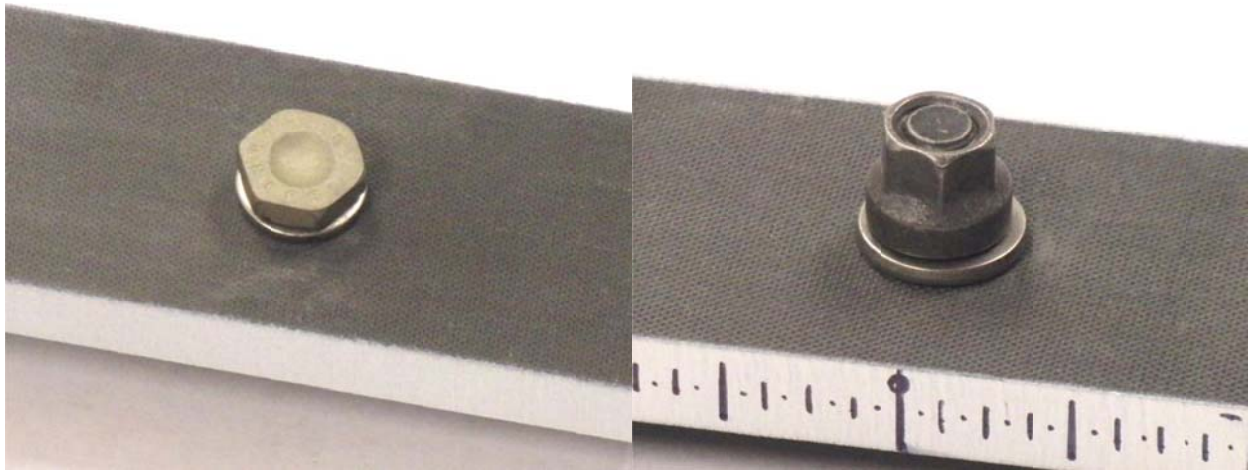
Specimen with Fastener Installed (Left: Fastener Head Side; Right: Fastener Collar Side)
